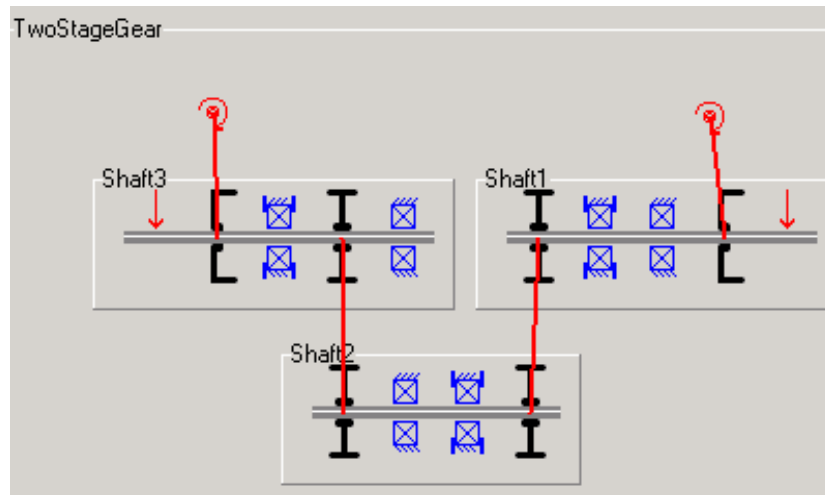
Scheme of the gearbox including power flow (red), machine elements (shafts, gears, couplings, bearings) and external forces on the input and output shaft
